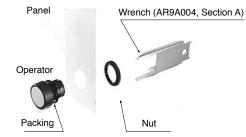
Mounting an operator in a 22.3mm-dia. hole
